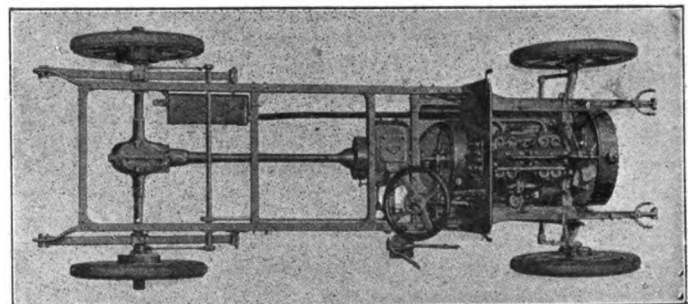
Plan of Chassis of Stella 16-20-h.p. Car.
